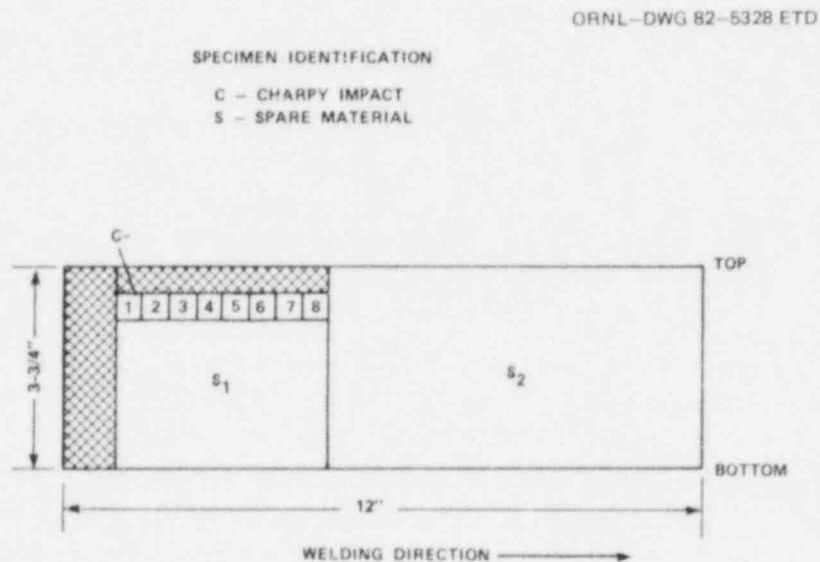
Side-View Cutting Diagram of Weld V8Q2
